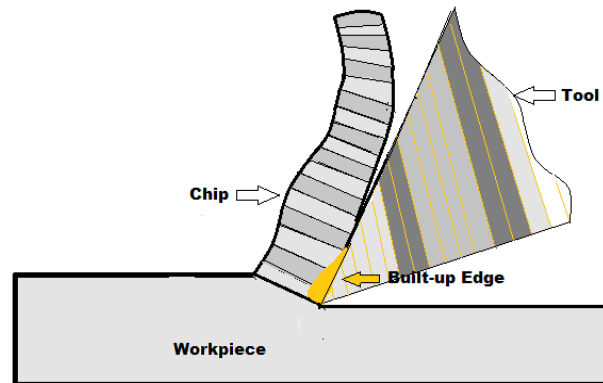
Illustration of built-up edge of a portion of the primary shear cutting zone with overheated work piece material, which becomes "welded" onto the rake face of the tooth during the slotting process.
